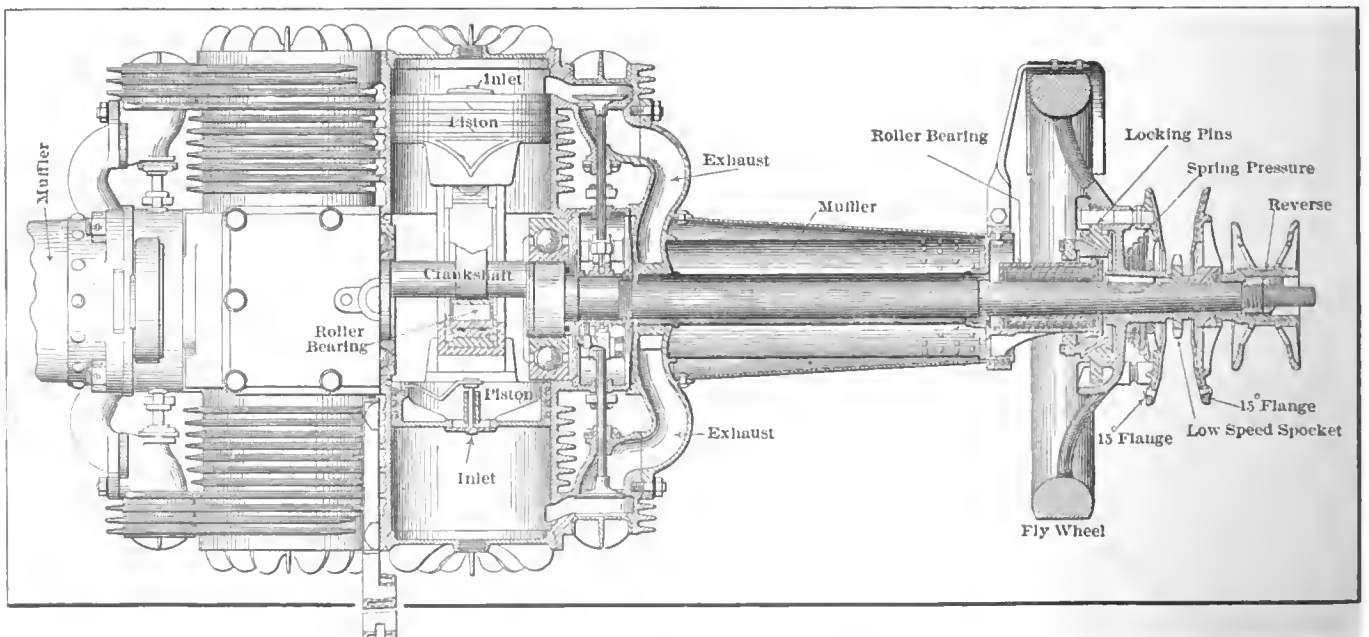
Holsman type of motor in part section with one end broken off, but presenting evidences of use of ball or roller bearings at every point and other novel features
